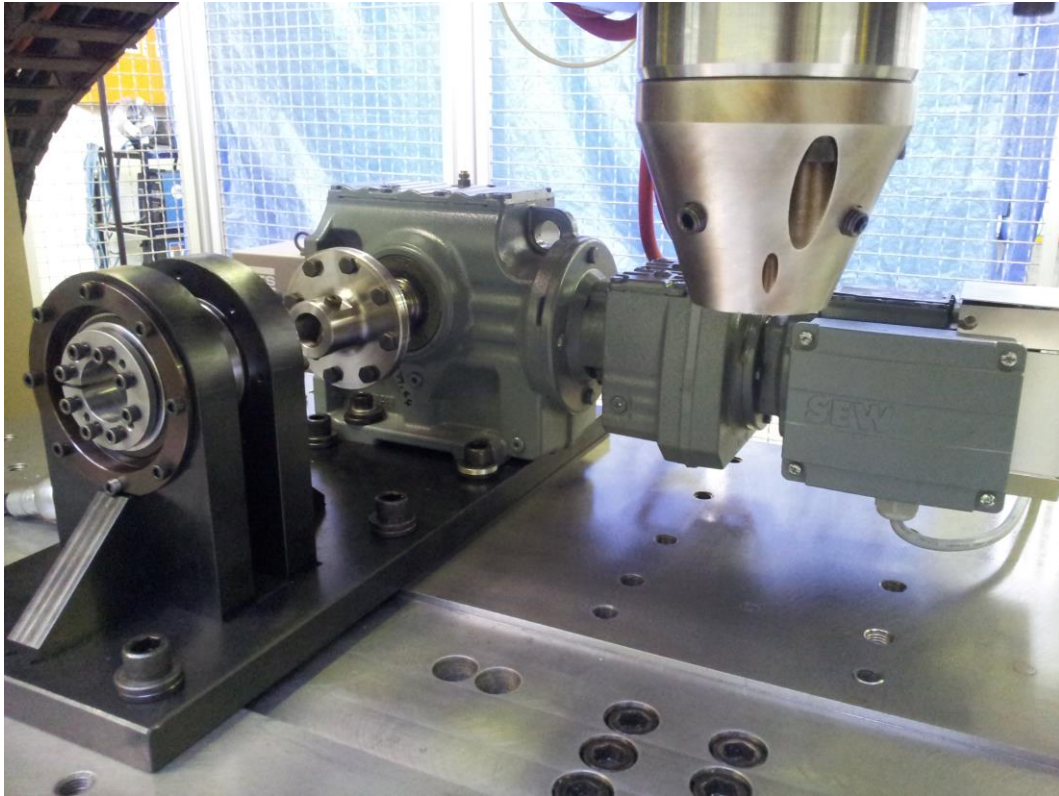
The various tube welding system components mounted on the table of the I-STIR platform.
